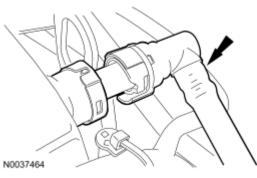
Locating Crankcase Vent Tube Courtesy of FORD MOTOR CO.
